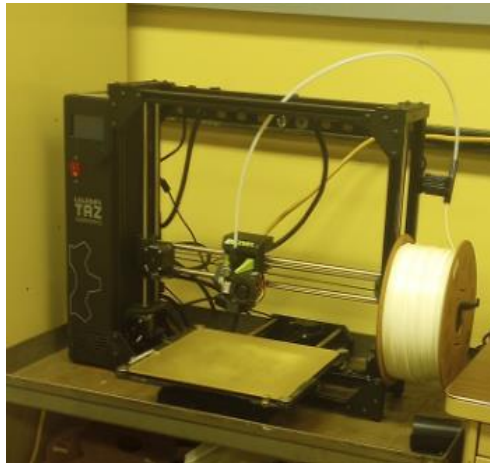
LulzBot TAZ Workhorse 3D printer used for flange production.
